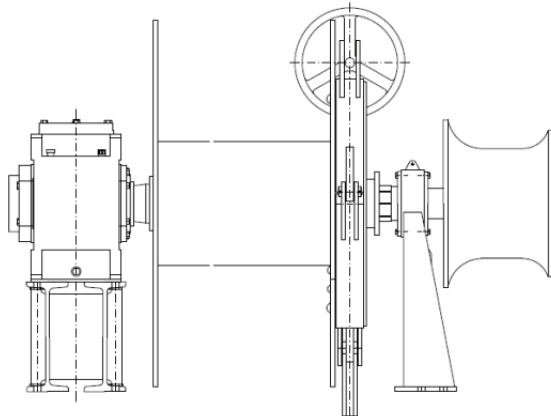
Mooring winch with single drum, pull 80 KN. Source: Carral Design Engineering Solutions
